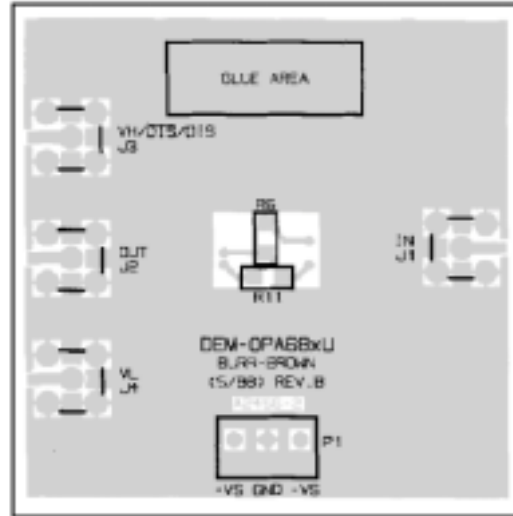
DEM-OPA68xU Demonstration Board; Bottom View
